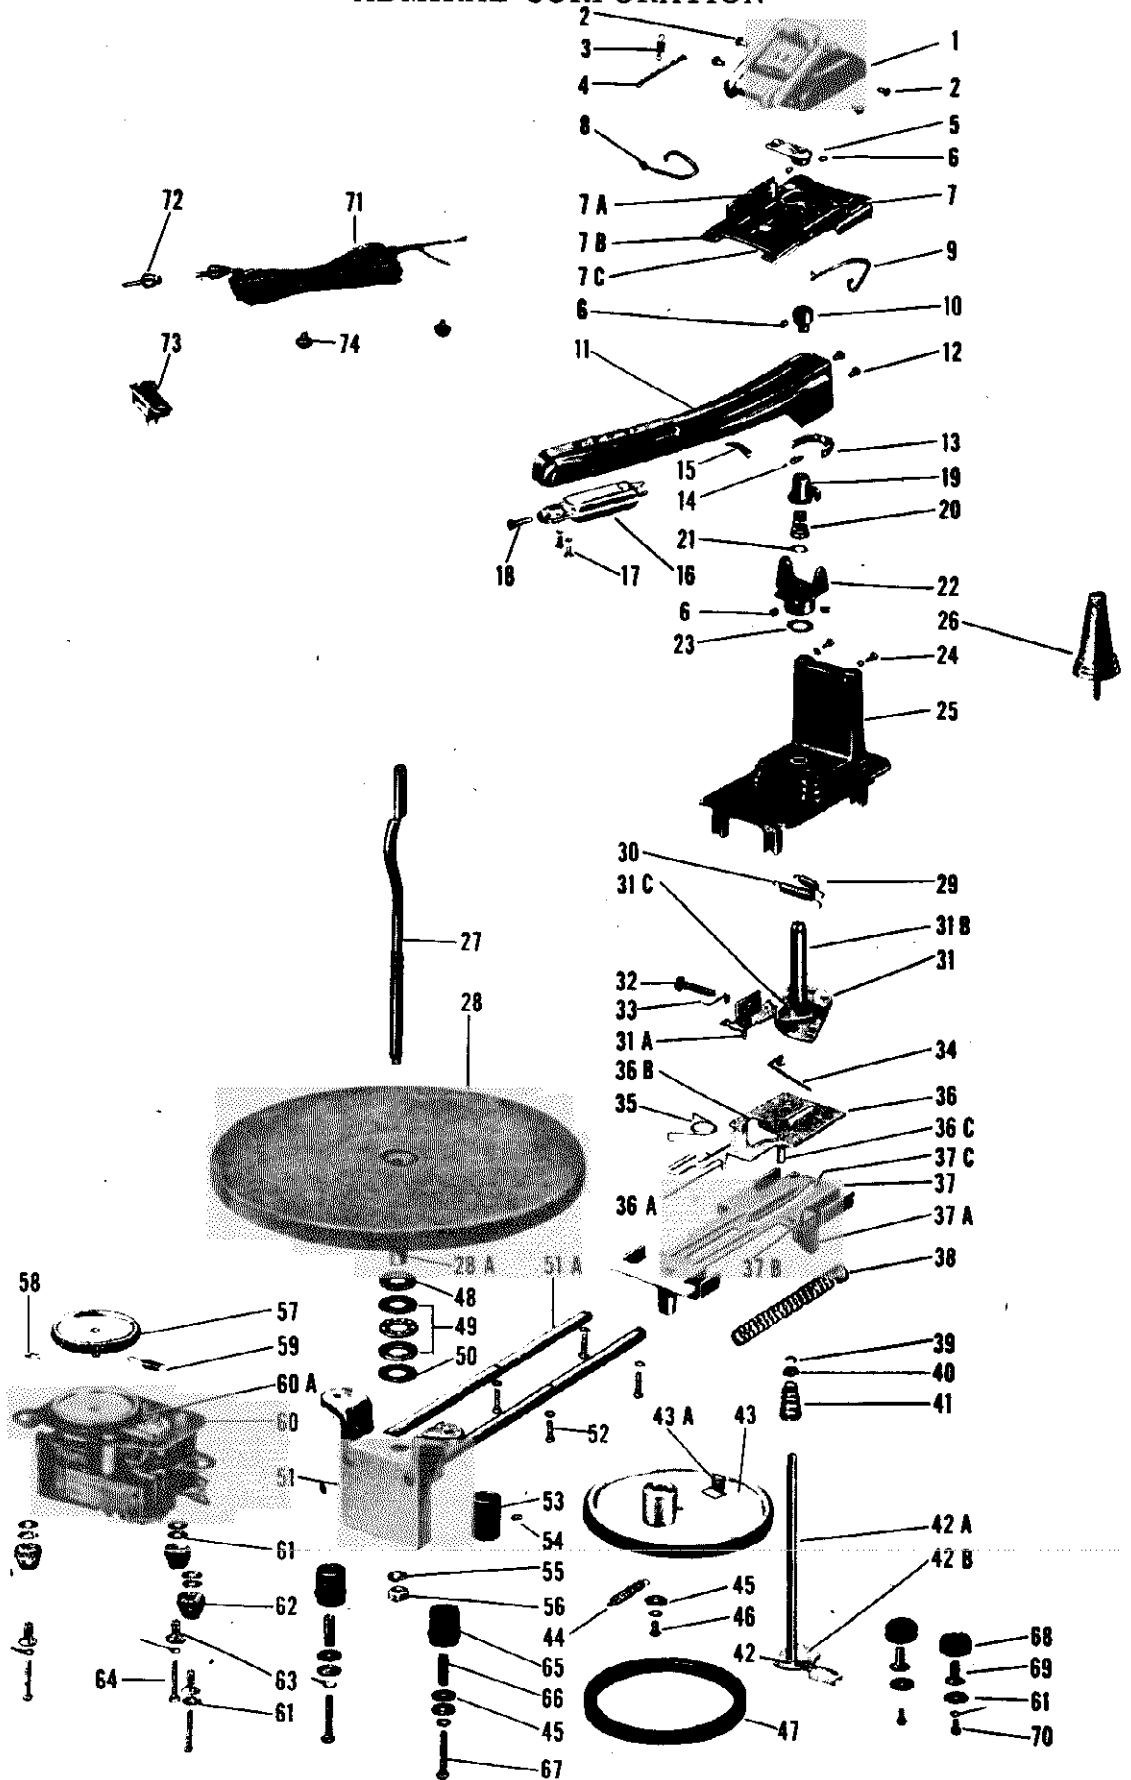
RECORD CHANGER, EXPLODED VIEW
